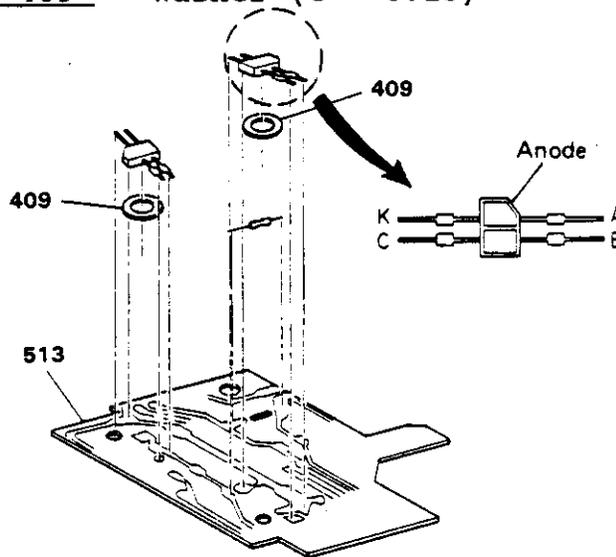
REEL PANEL ASSEMBLY (513)
